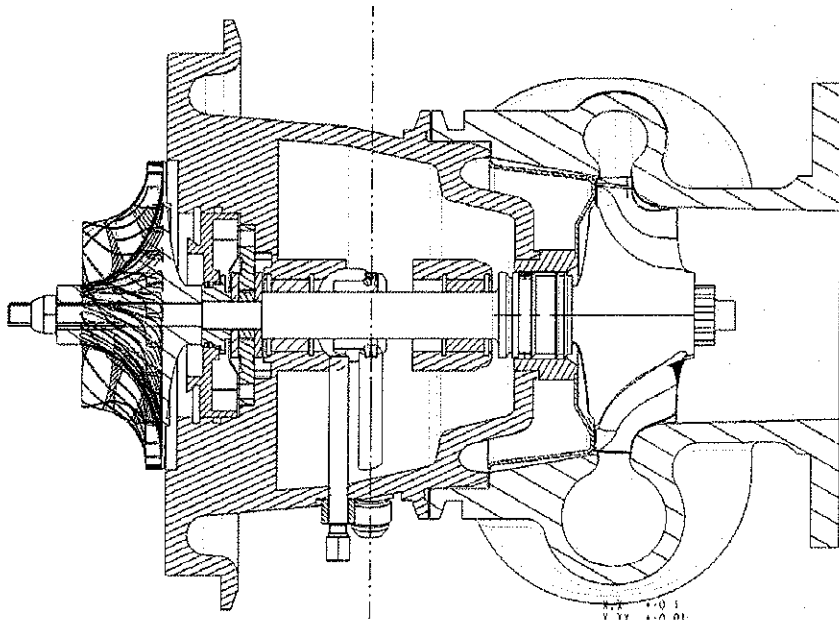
Compressor / Bearing Core / Turbine Assembly
